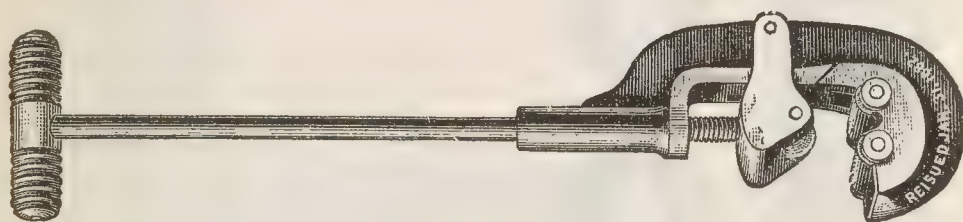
,255.—Saunders one wheel and roller pipe cutter.
